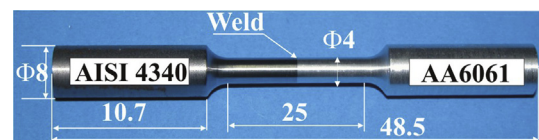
Tensile test specimen with dimensions (all dimensions in mm).
